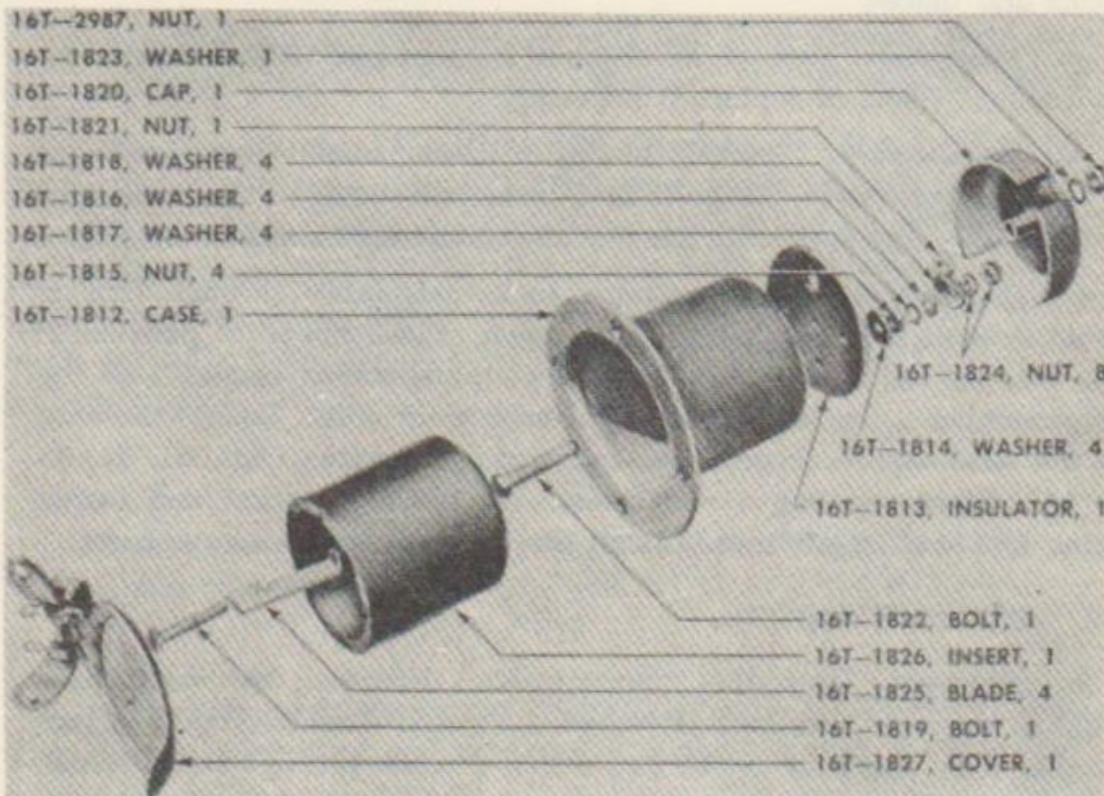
COUPLING SOCKET—EXPLODED VIEW
